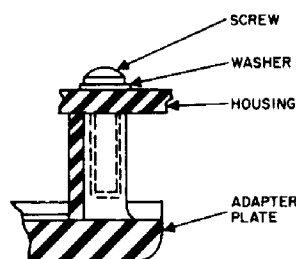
Installation of the Old-Style TCU Adapter Plate to the Housing.
